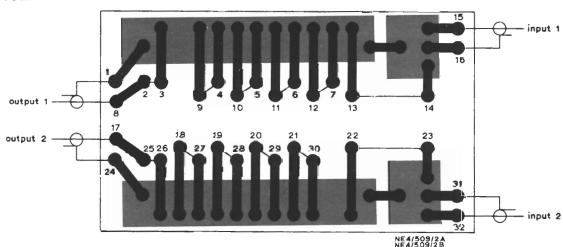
NE4/509 Printed Wiring Board viewed from the component side
